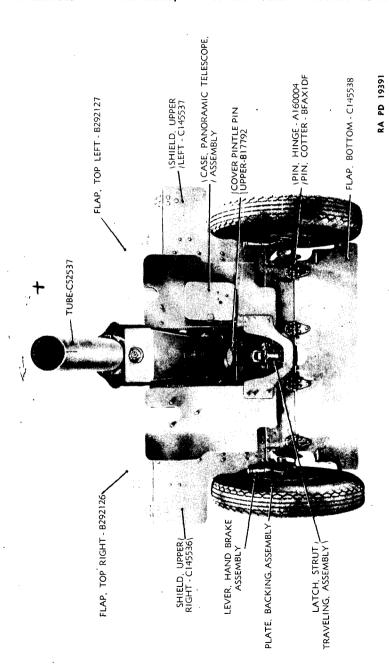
105-mm Howitzer M2A1 and Carriage M2A2 - Front View
